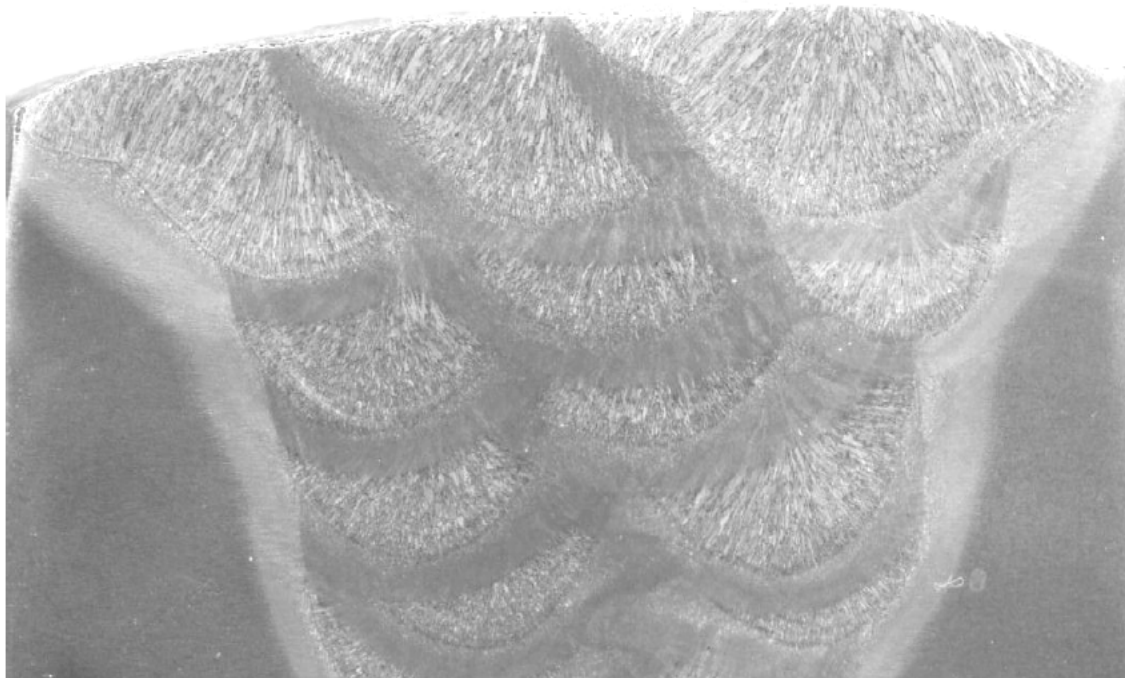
Weld Macro Photograph – Specimen #1
